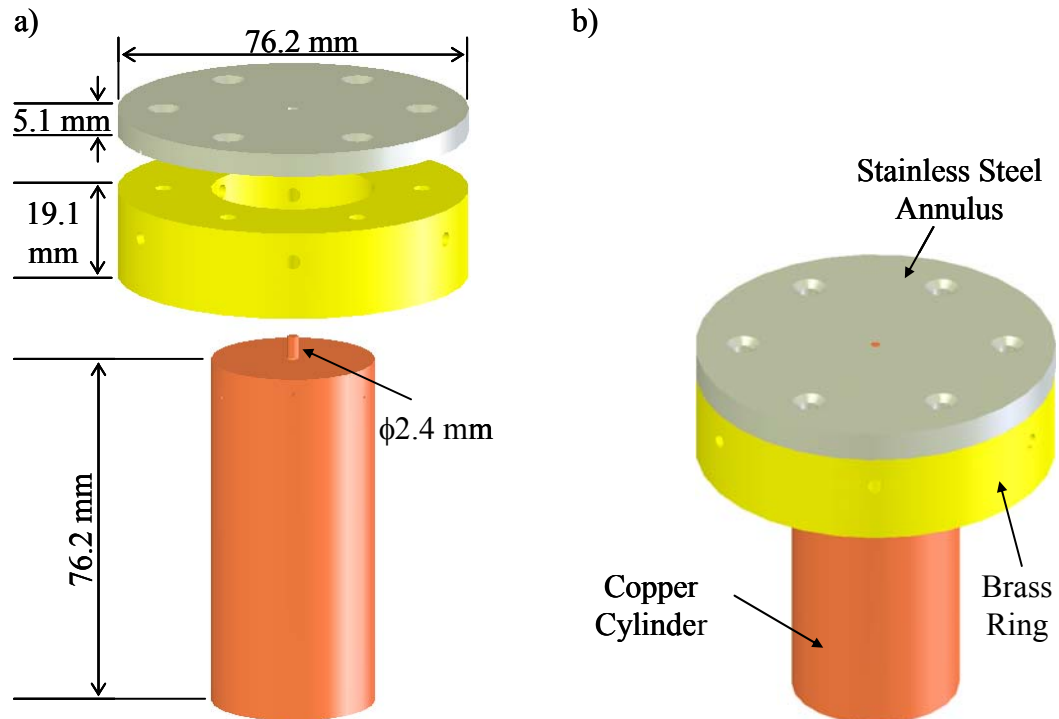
a) Exploded view of single bubble heater core, b) assembled view.
